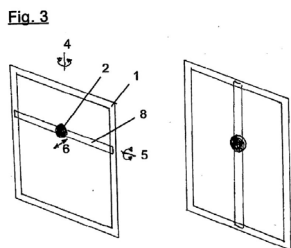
System for hanging different items on walls (Nicolaisen, 2009).
